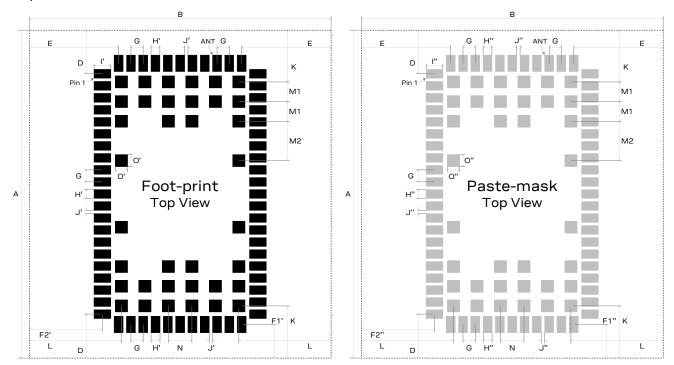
LENA-R8 series modules suggested footprint and paste mask (application board top view)
